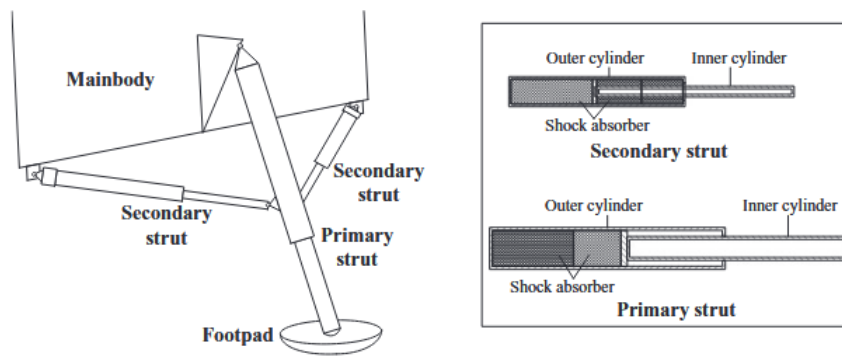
Cantilever configuration of landing gear, with strut design layout [42]
